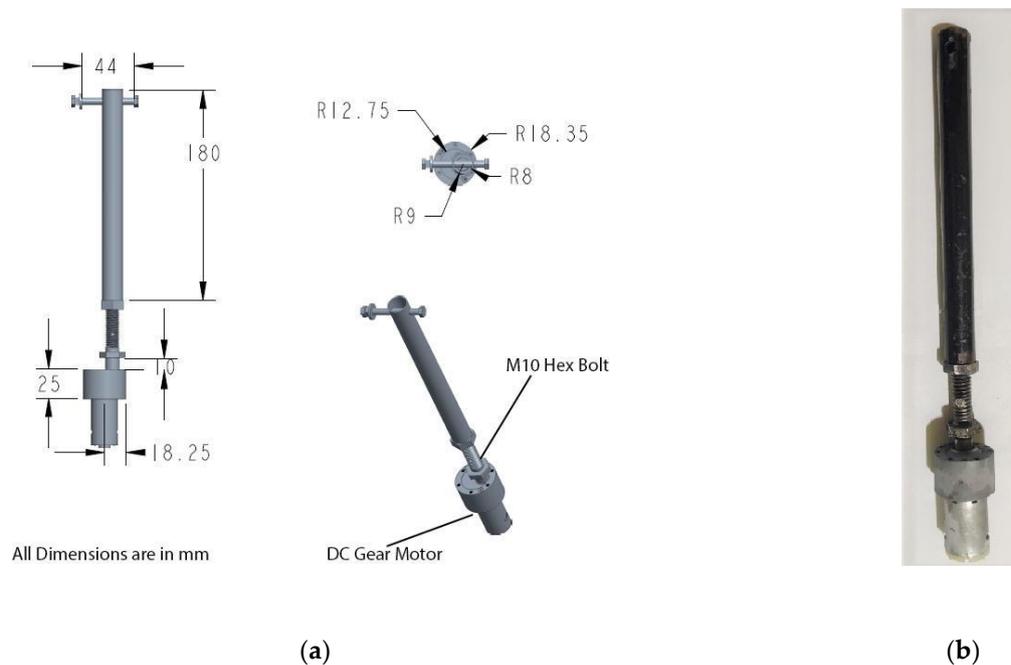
(a) Design of Linear Actuator; (b) Developed Linear Actuator
